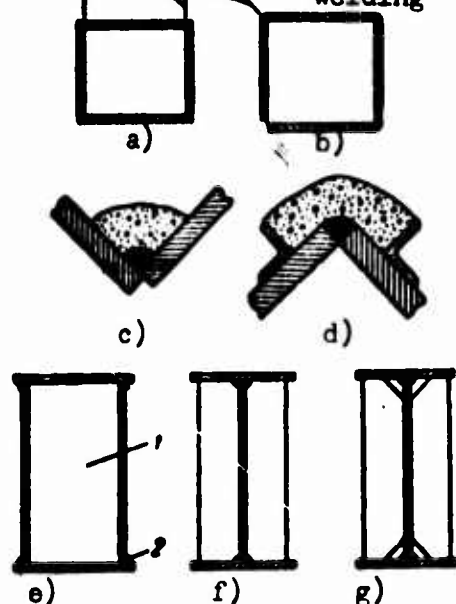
Peculiarities of welded units during automatic welding under flux.
